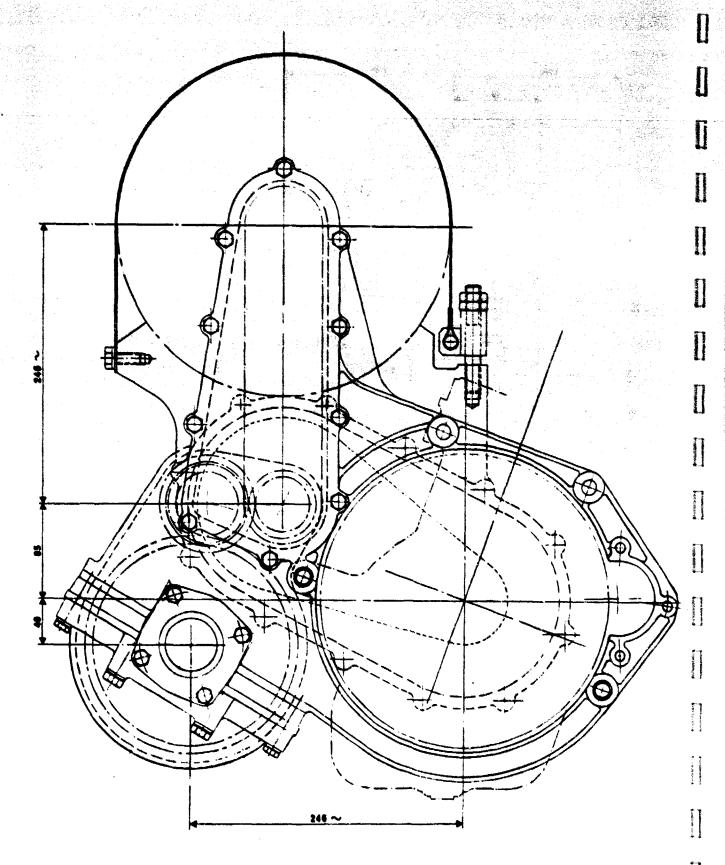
TRANSMISSION GROUP MECHANICAL DRAWING SIDE VIEW
